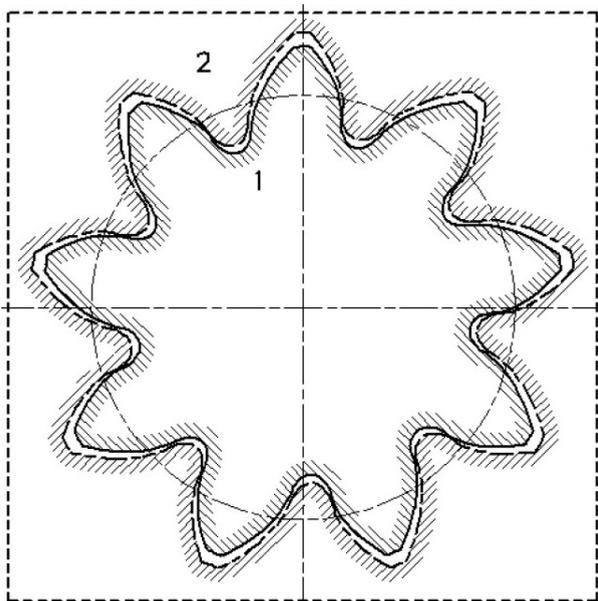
Gear molding; 1) gear profile; 2) mold or die cavity profile.
